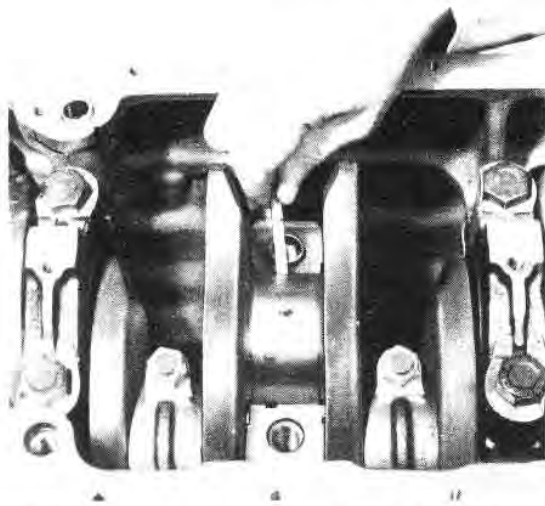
Removing a Main Bearing Shell with the Crankshaft "in-situ"
